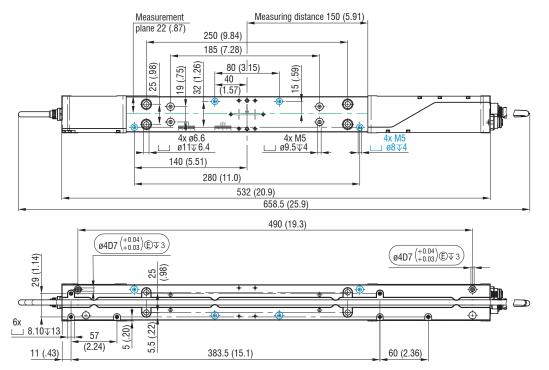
Light source and receiver ODC2700-10, ODC2700-40 with mounting rail, dimensions in mm (inches)
